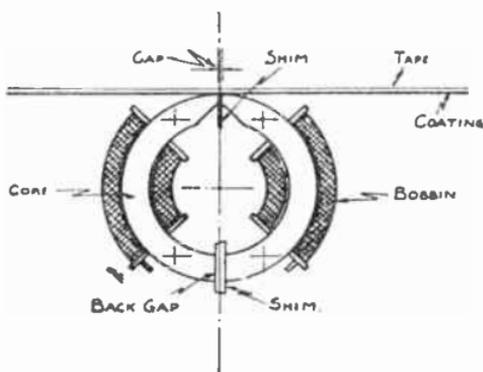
TYPICAL HEAD ASSEMBLY.
